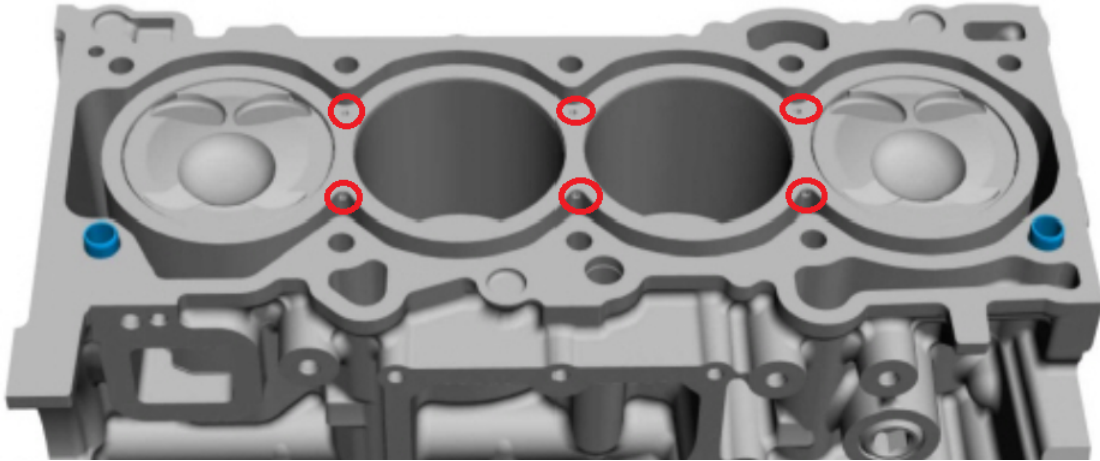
Slot between cylinders removed and the block is cross drilled between cylinders. The coolant flows through the head, block and head gasket then across to the side of the cylinder locations circled in red.
